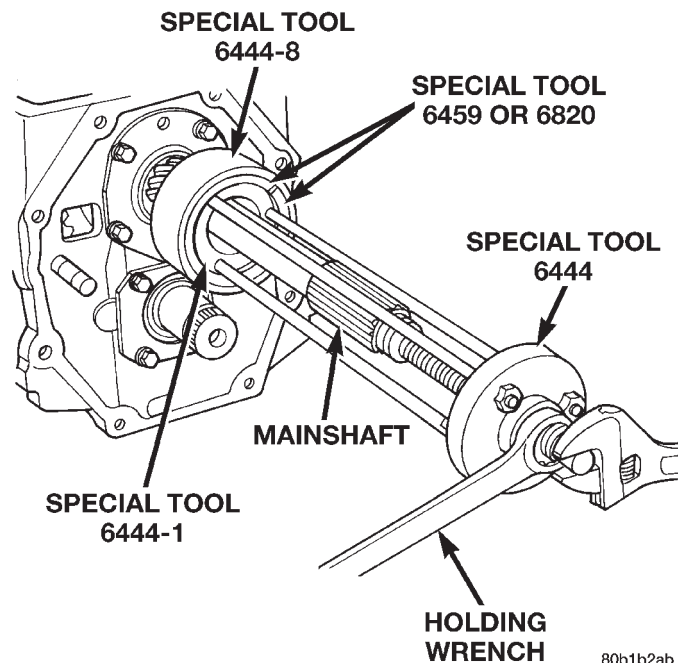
Removing Fifth Gear From Mainshaft Splines
